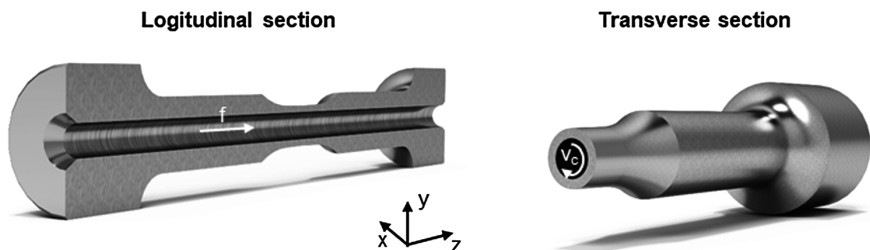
Sketch of the longitudinal and transverse section of a single-lip deep hole drilled fatigue specimen.
